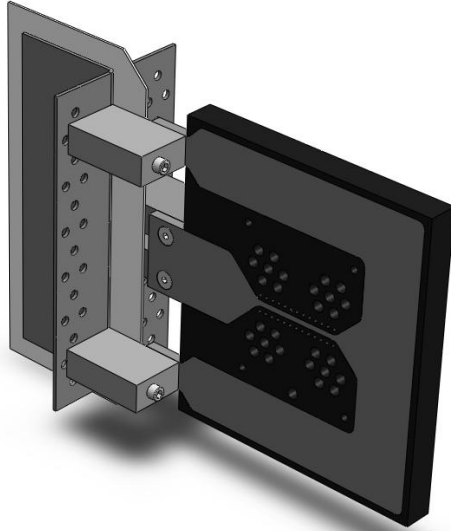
View of single sided coil showing basic coil shape with backing and attachment to capacitor bus.
